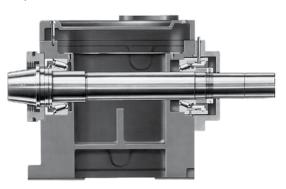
Simple mounting with a Hydra-Rib cooled by an axial oil inlet and a TS bearing with oil jets at both end of the rollers for inlet and cooling.
